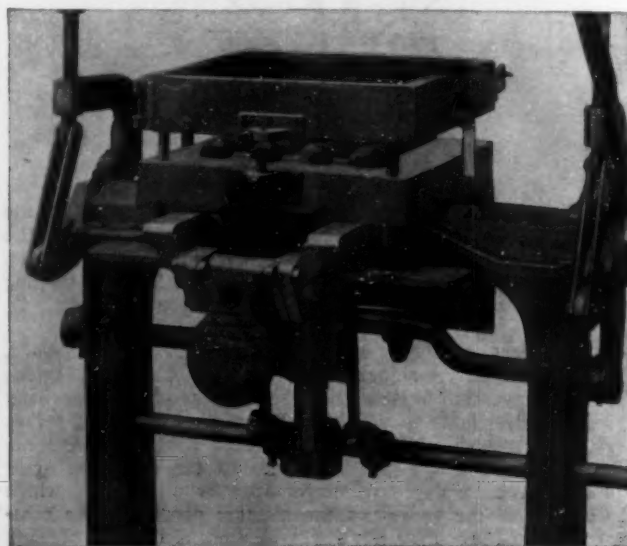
MACHINE USED WITH STRIPPING PLATE, OR CAN BE USED AS A PLAIN SQUEEZER.
